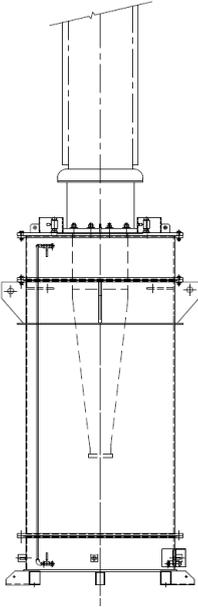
Example of a test tank – for 500kV DC bushing testing (moulded pressboard insulating system not shown)
